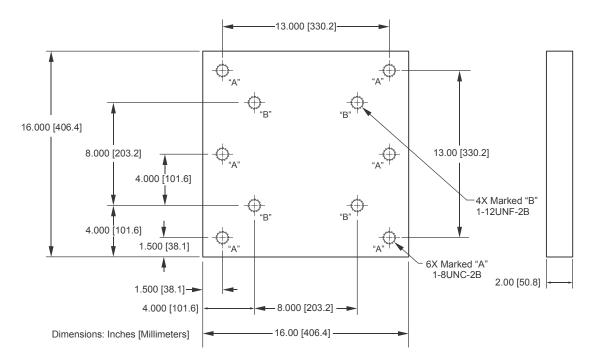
Mounting Plate Dimensions 150K - 225K
